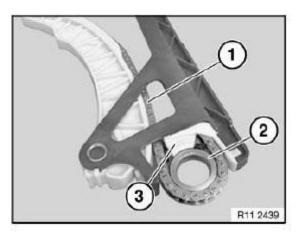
Identifying Timing Chain, Chain Guide And Sprocket Wheel Courtesy of BMW OF NORTH AMERICA, INC.
